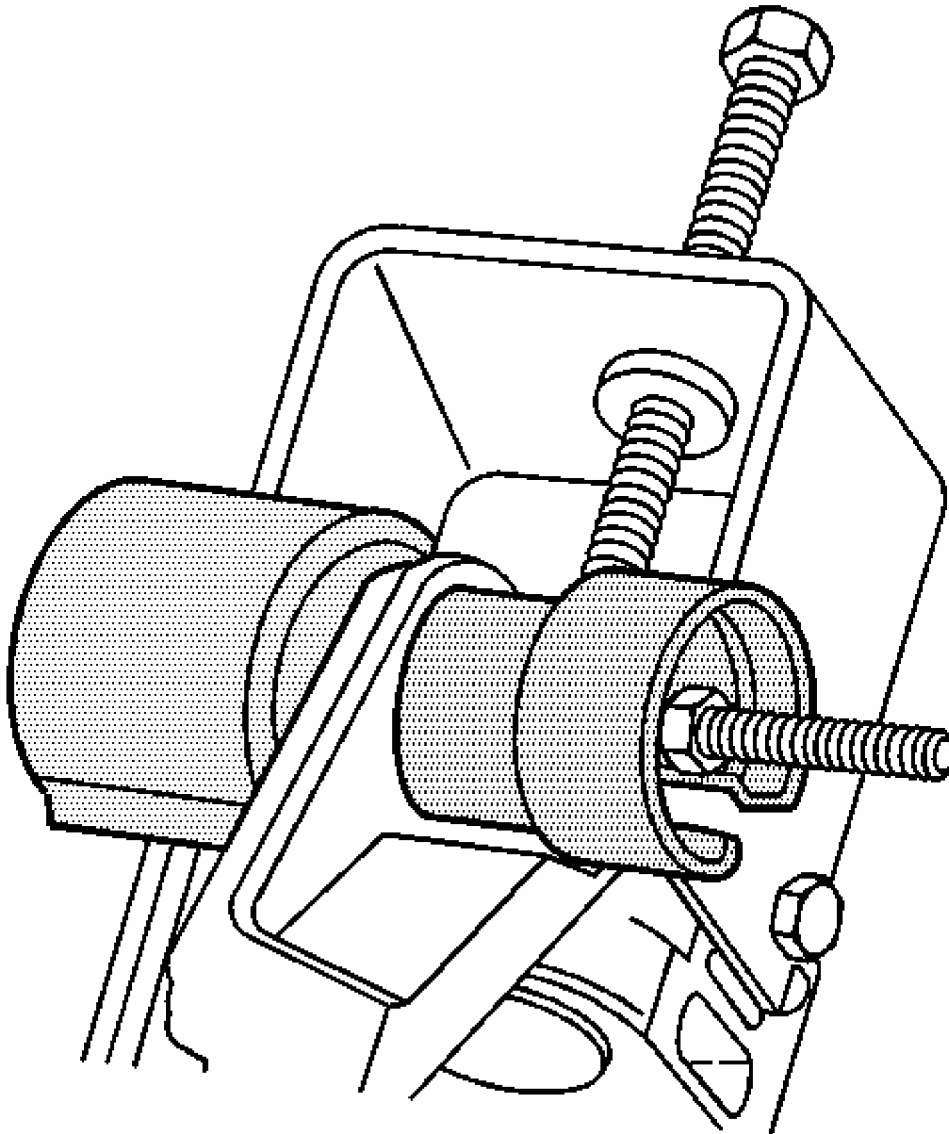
Installing J 33791 Onto Differential Carrier Assembly Bushings
